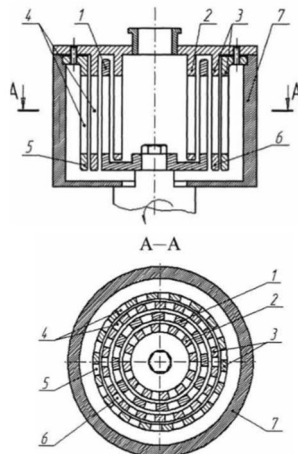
Rotary-pulsation apparatus with a single rotor and two stators: 1 - rotor; 2 - internal stator; 3 - external stator; 4 - longitudinal slots of the rotor and stators; 5, 6 - parts of the external stator; 7 - housing
